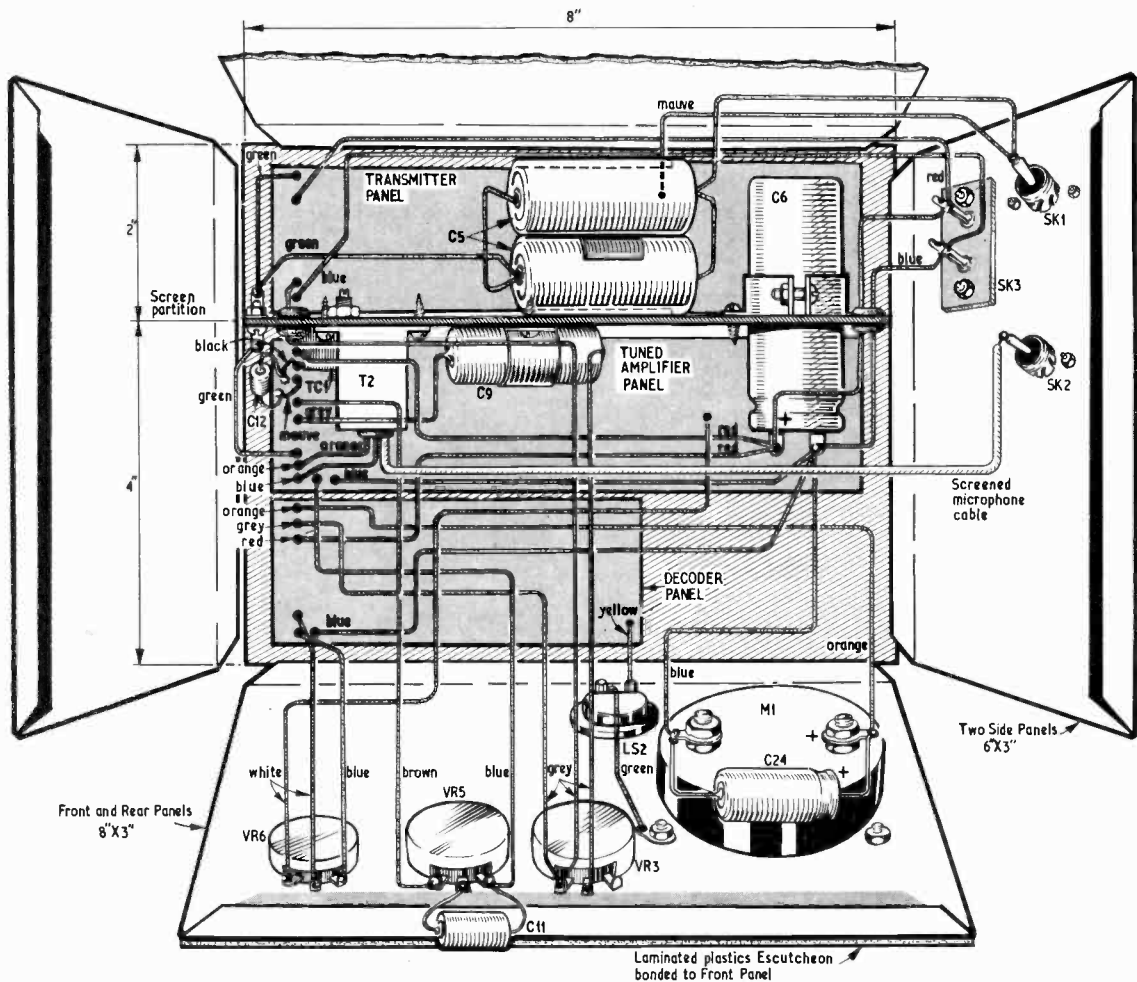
Internal arrangement of plate mounted components and panel boards on chassis
